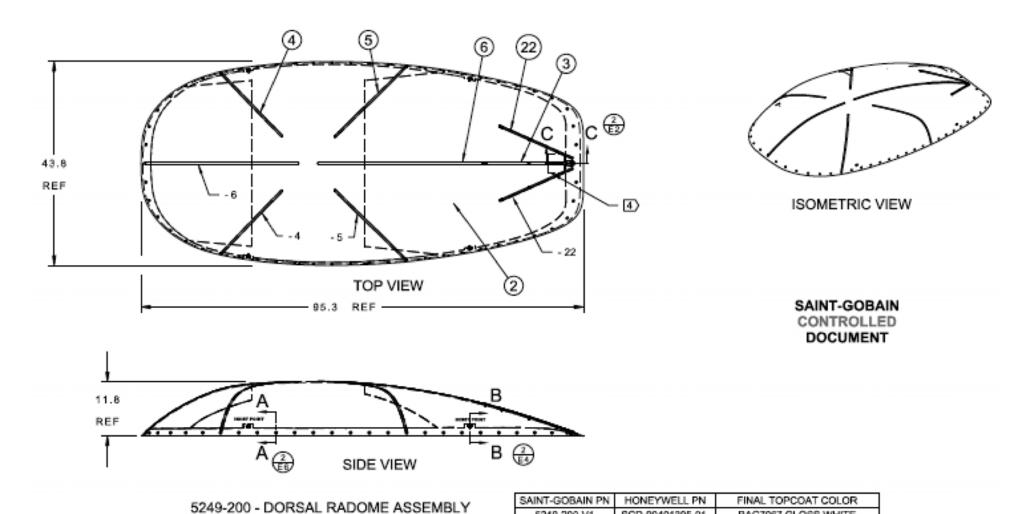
(Sheet 14 of 14) FMA Outline and Installation Drawing (90000380ICD, REV L)
